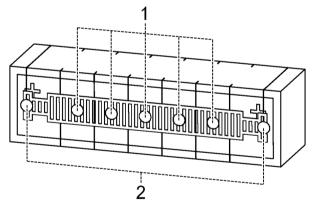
Pre-tinned soldering points of the positive electrode (example: P-885)
